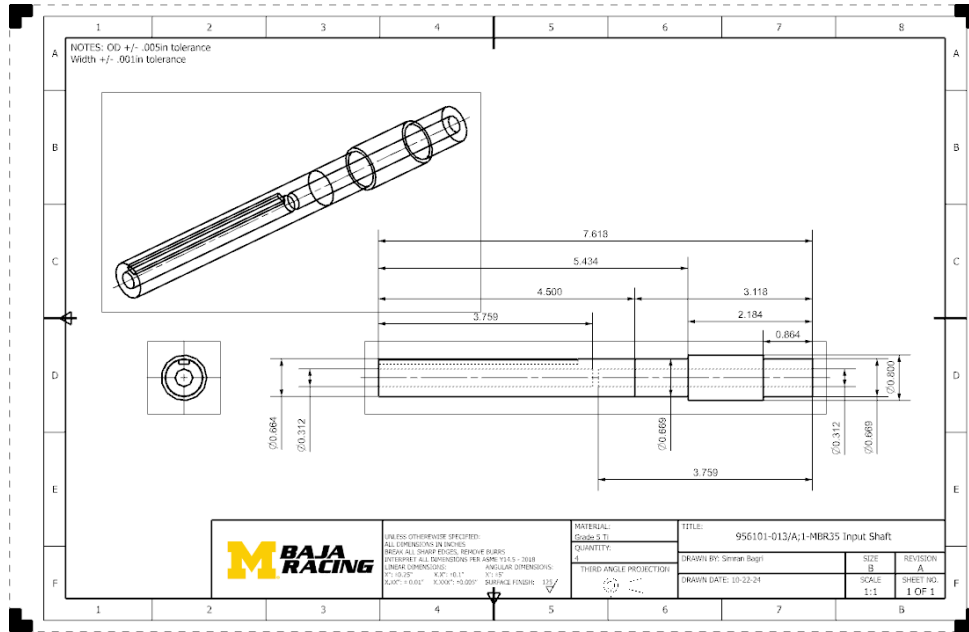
Part drawing of the input shaft for MBR machinists.
